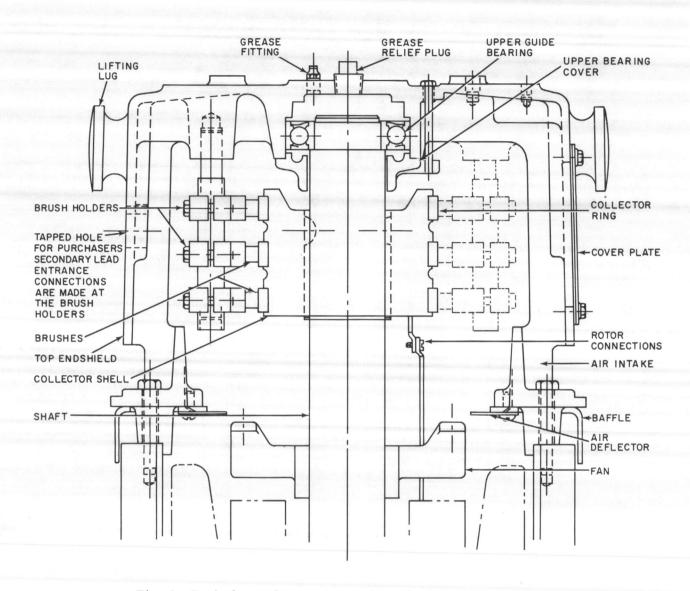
Typical wound-rotor-type motor, showing rings, brushes, etc.
